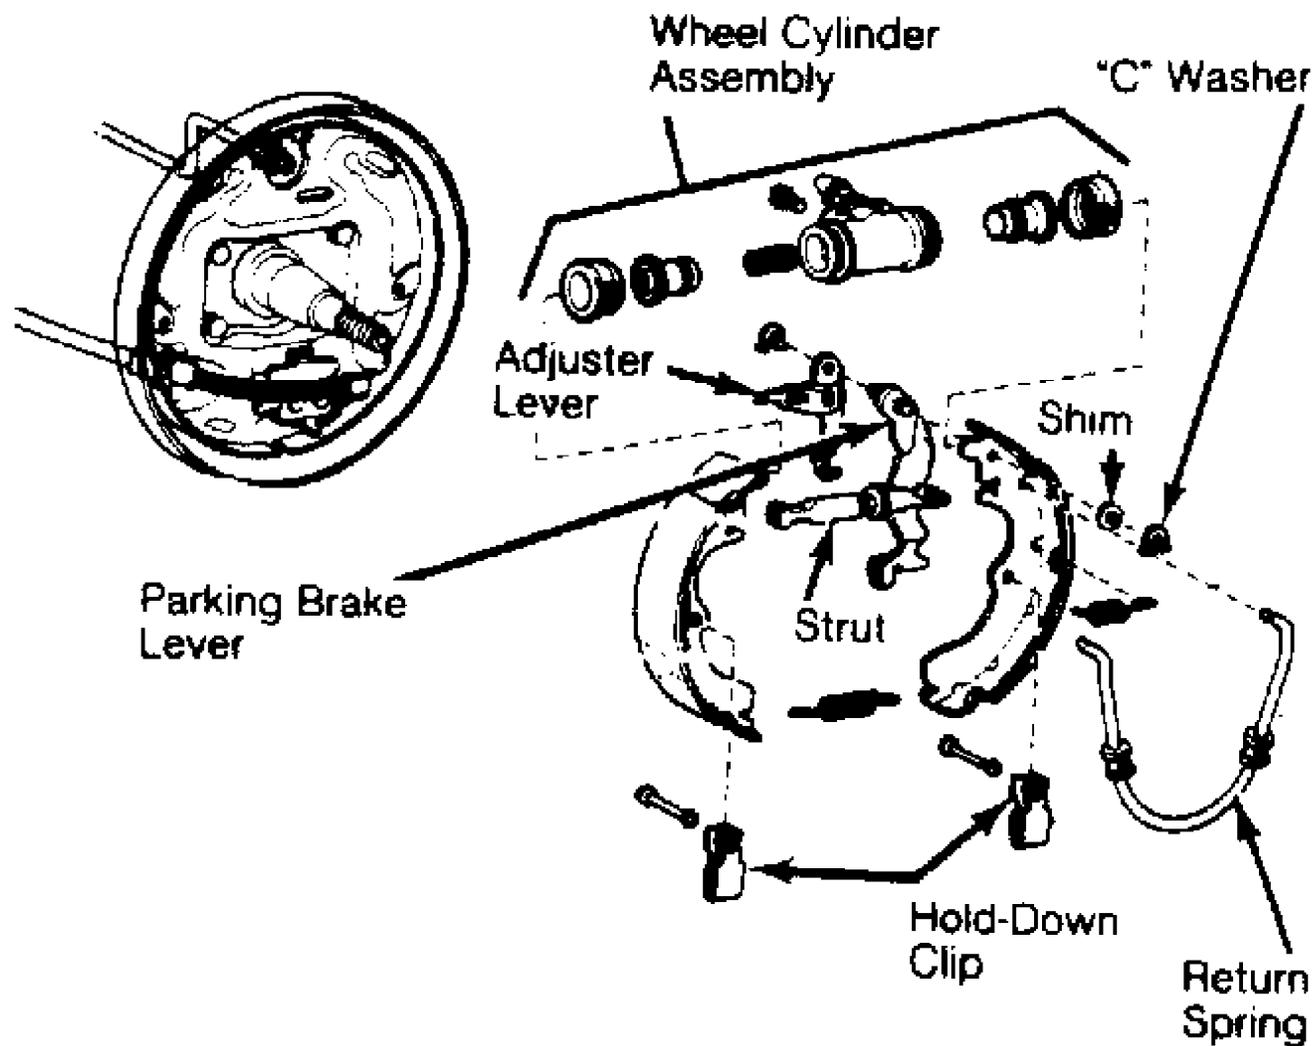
Exploded View Of Tercel Sedan Rear Brake
